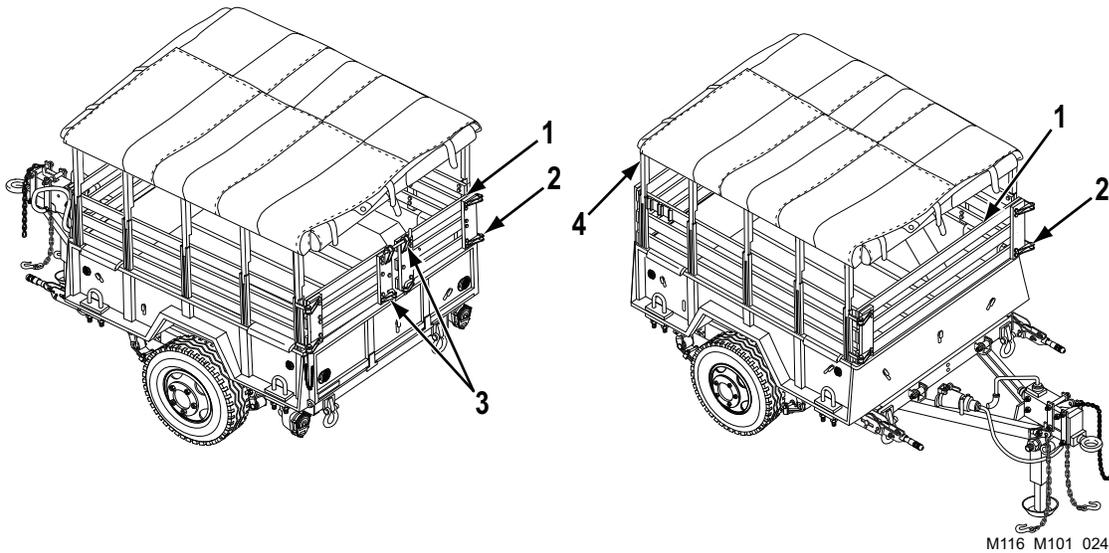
Tailgate, Front Rack, and Bow Assembly Check.
